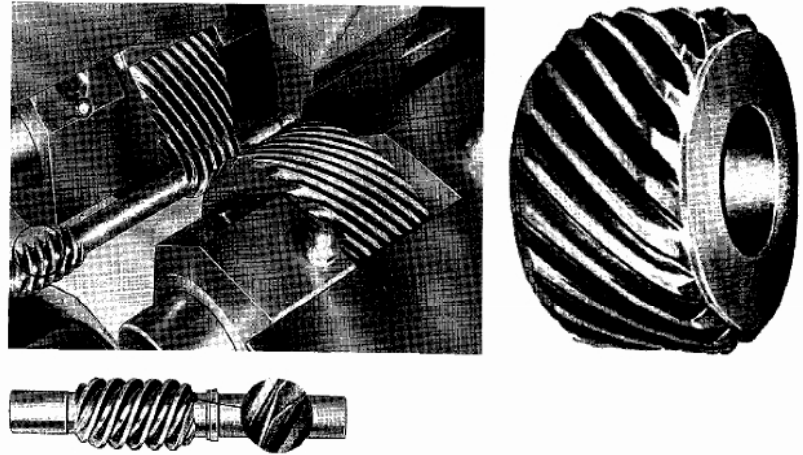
Worm gear being rolled by means of rotating rolling tools
